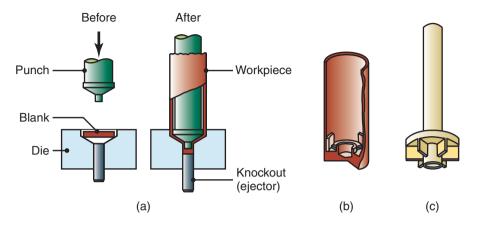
(a) Impact extrusion of a collapsible tube by the *Hooker process*. (b) and (c) Two examples of products made by impact extrusion. These parts also may be made by casting, forging, or machining. The choice of process depends on the materials involved, part dimensions and wall thickness, and the properties desired. Economic considerations also are important in final process selection.
